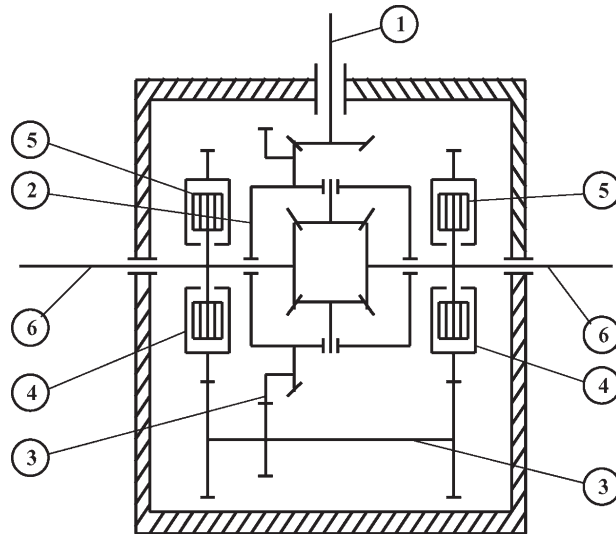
Schematic of an example rear active differential [9]. 1 - input shaft, 2 - bevel gear differential, 3 - additional gearing, 4 - clutch housings, 5 - clutch disks, 6 - output axles.
